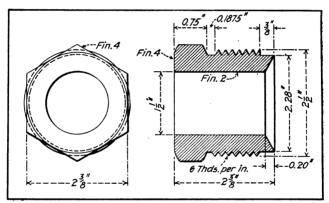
System for Indicating Finished Surfaces Applied to a Drawing.
